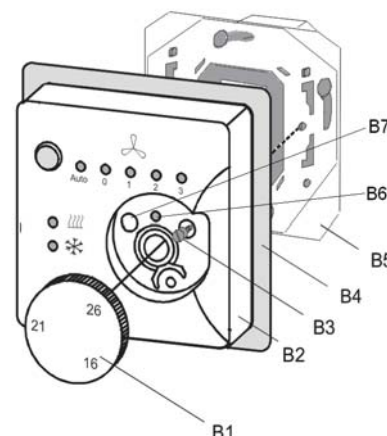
Mounting the Fan-Coil Unit Operator Panel
